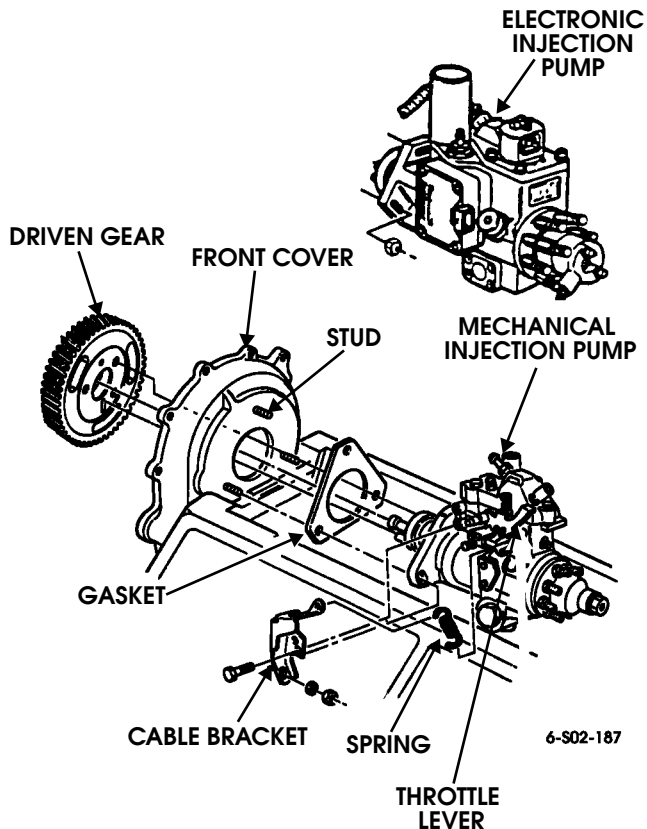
Fuel Injection Pump and Driven Gear Removal
